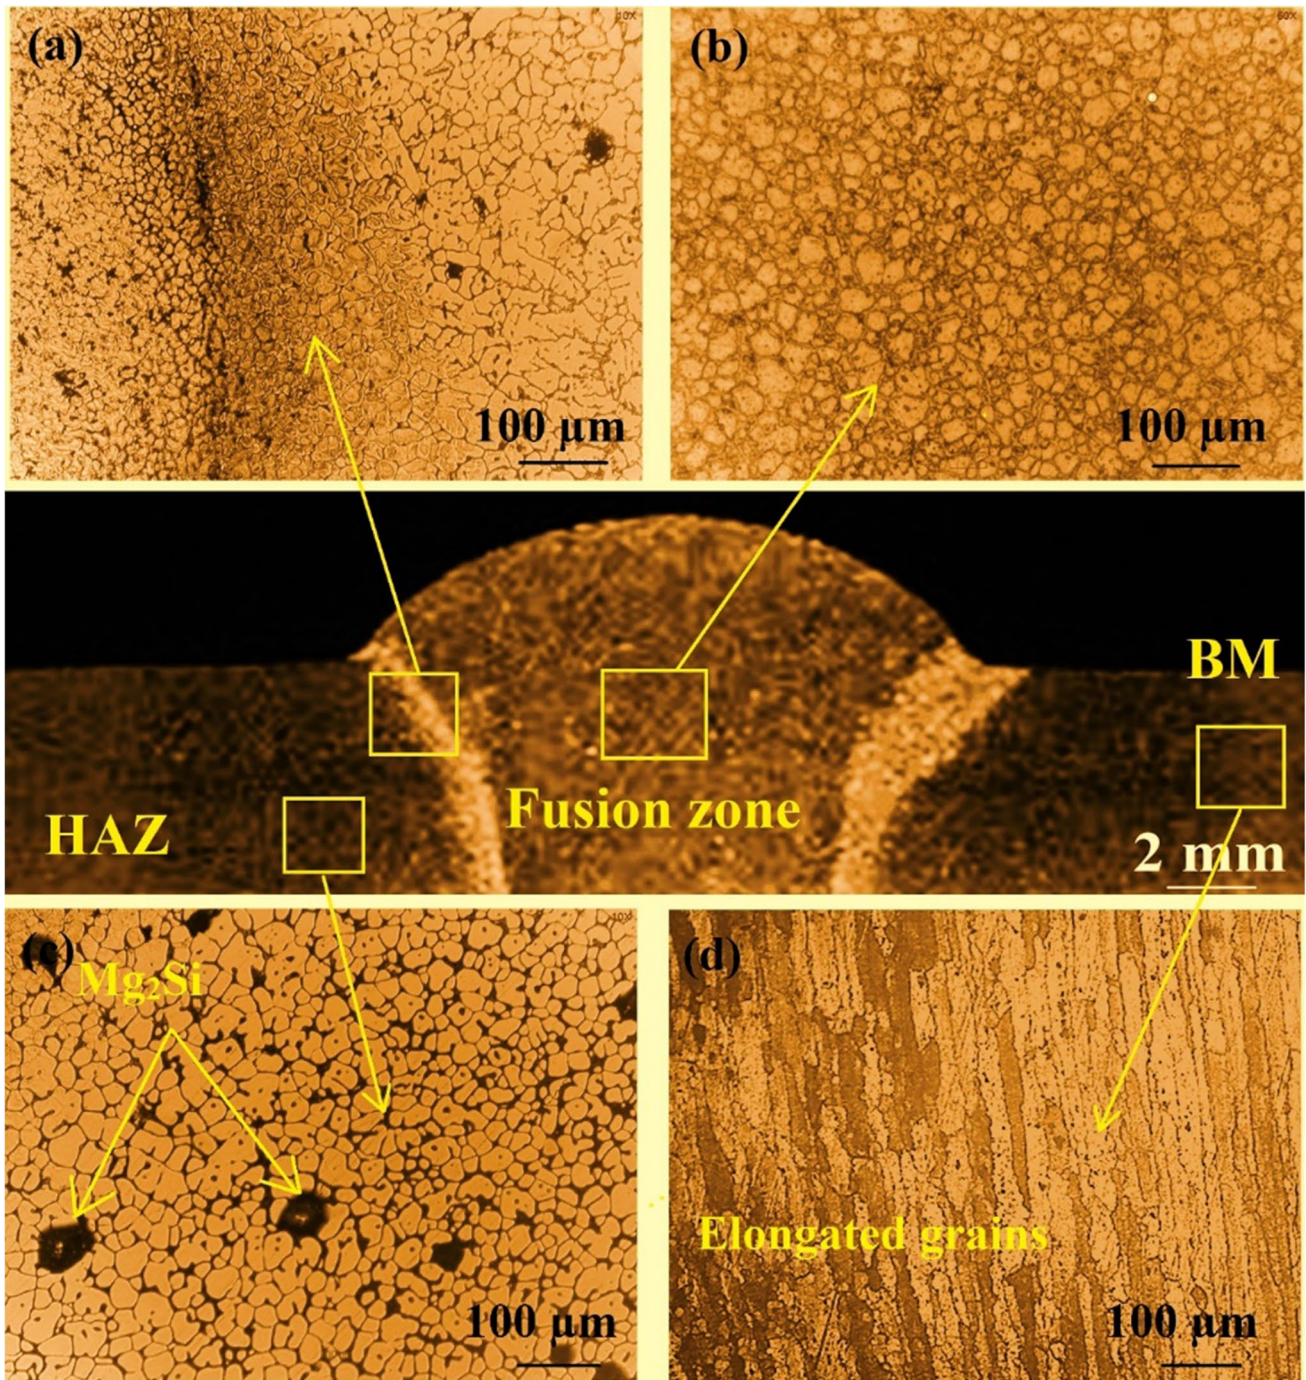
TIG welded joint of AA5083 and AA8011 with filler ER4043, (a) different zone of TIG welding, (b) HAZ region, (c) fusion zone, (d) welding zone
